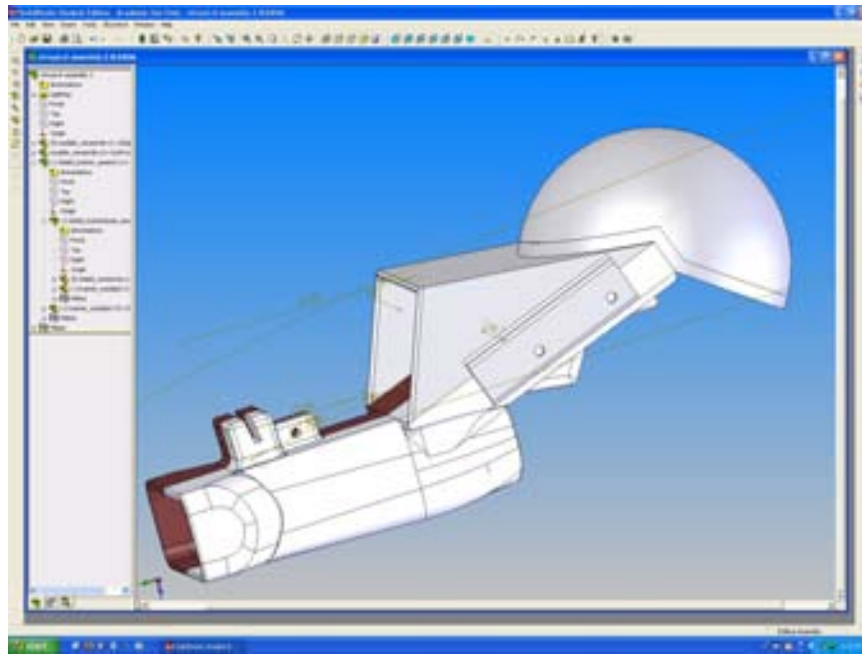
CAD schematic of mock Sonic Flashlight casing.
